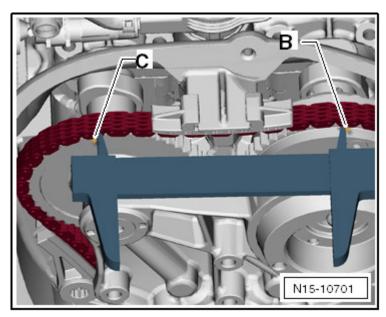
Identifying Measurement Points From Mark On Intake Camshaft -B- To Mark On Exhaust Camshaft -C-
